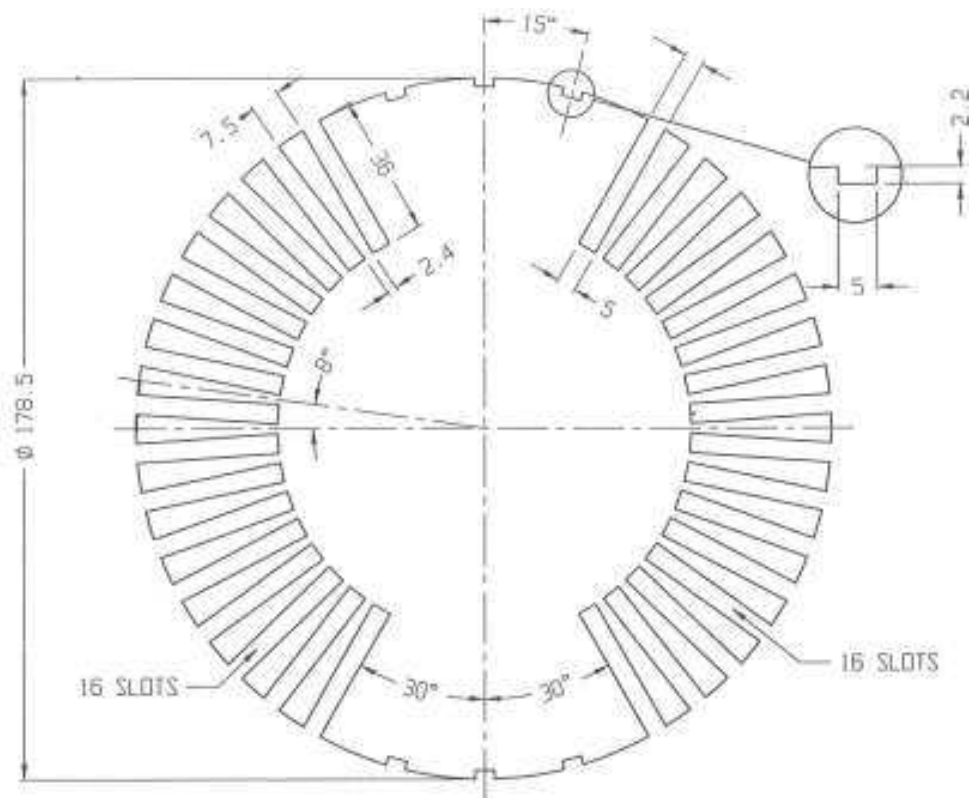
Drawing showing dimensions of the rotor of the mini-generator
